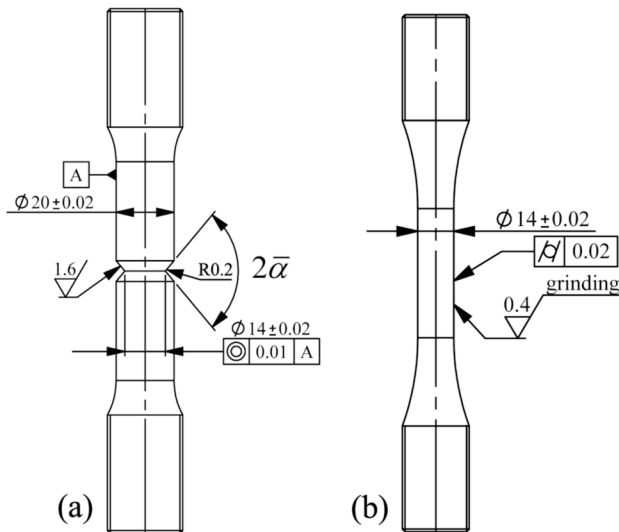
Technical drawings of the specimens used in fatigue axial tests: (a) V-notched specimens with variable opening angle angle $2\bar{\alpha}$ of 60° , 100° , 140° , 160° , 170° ; (b) plain specimen with a gage diameter of 14 mm.
